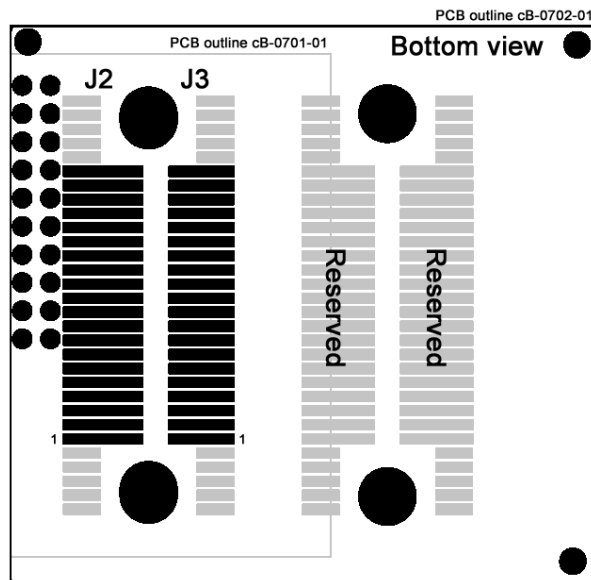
Bottom view of the two PCBs with the pinning of the J2 and the J3 connector.
